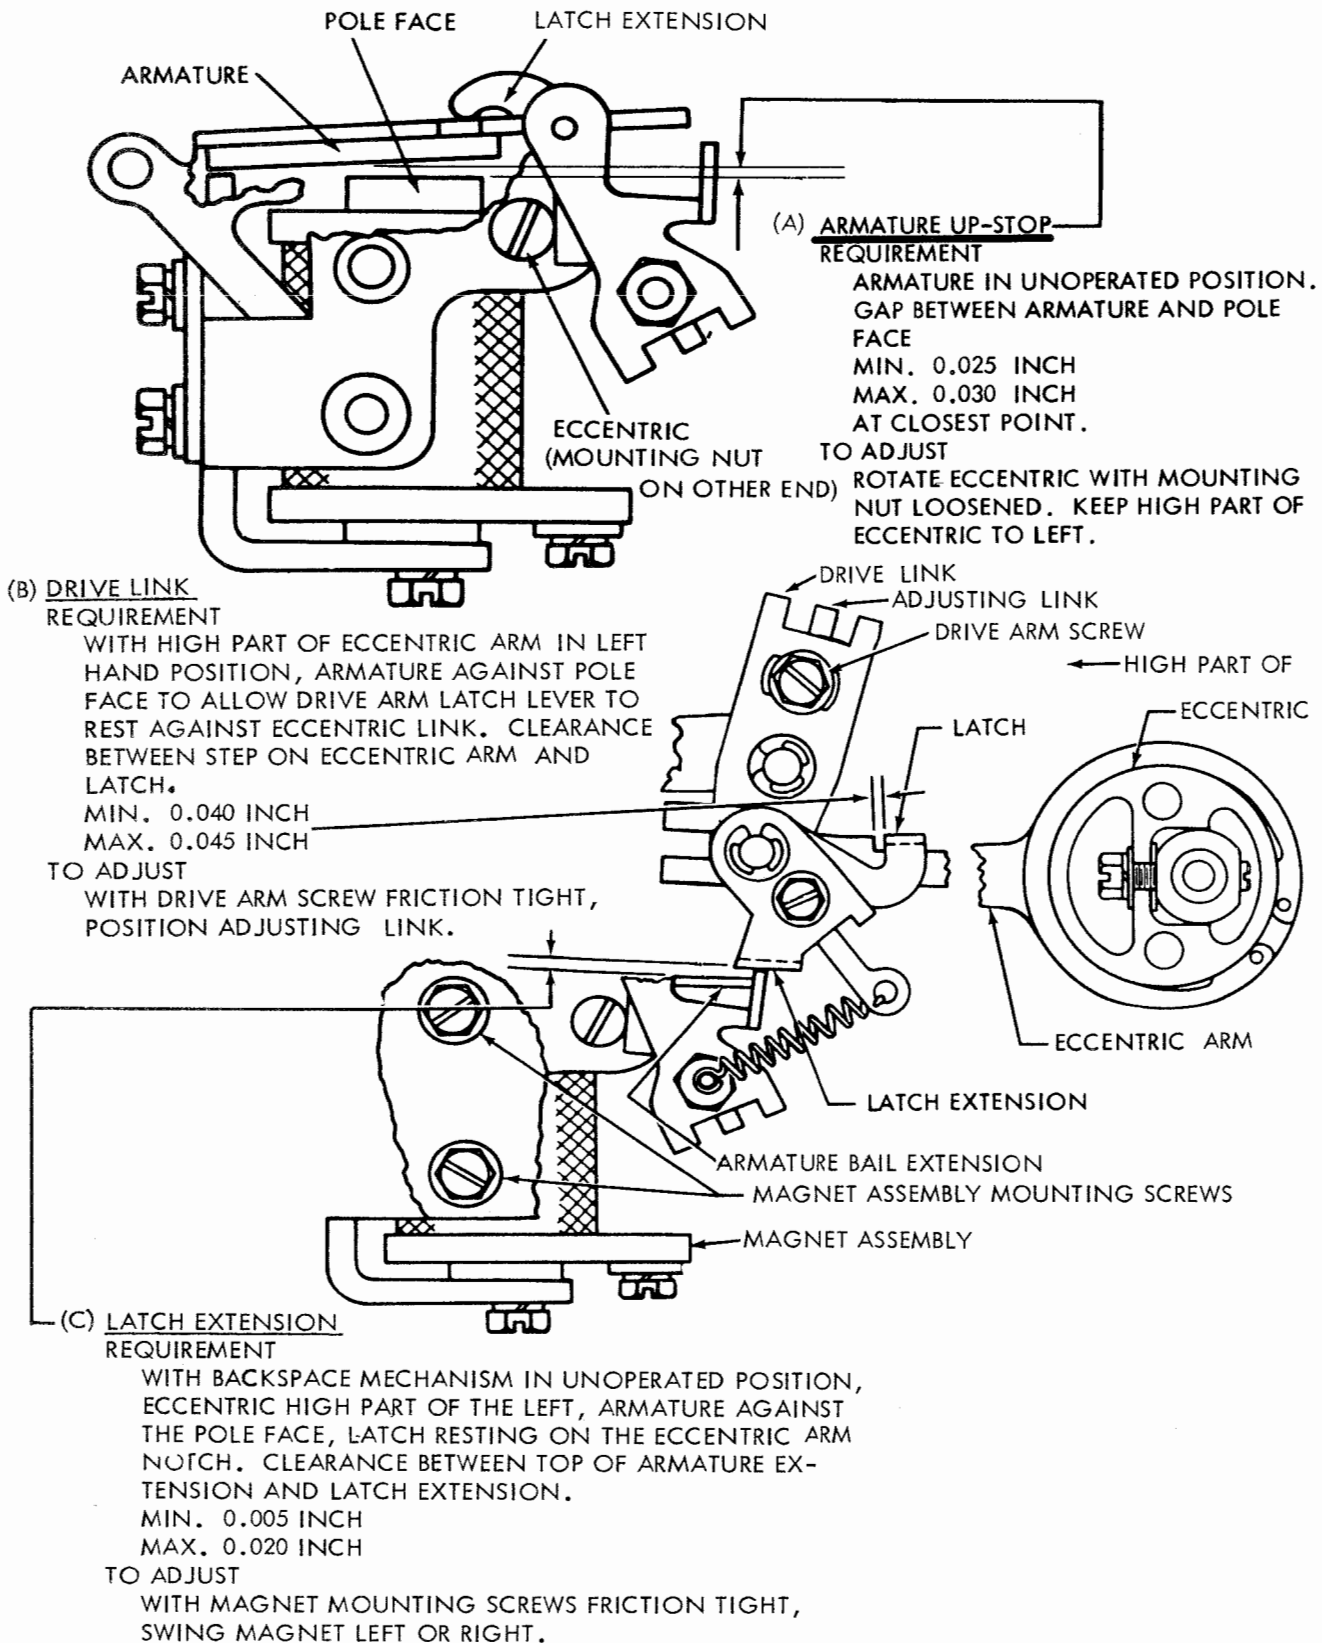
I. TYPING REPERFORATOR TT-373/UG, TT-375/UG, POWER DRIVE BACKSPACE MECHANISM FOR FULLY PERFORATED TAPE
